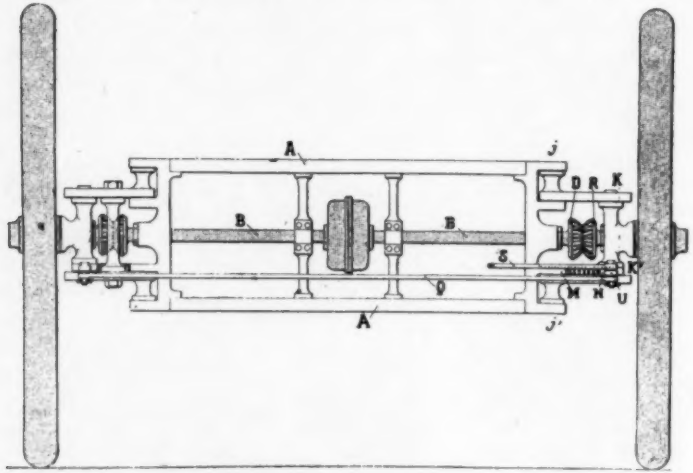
Elevation of the Fore-Carriage. *AA*, Carriage-Frame *BB*, Motor-Shaft Carrying the Differential. *D*, Hemispherical Gear on the End of the Motor-Shaft. *R*, Hemispherical Gears on the Spindle. *KK'*, Bracket in which the Wheels are held and turning about the Pivot *jj'*. *MN*, Guiding Segment Gears. *U*, Steering Rod. *S*, Steering Lever. *Q*, Bar connecting the Two Steering Rods.
